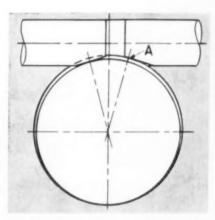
Clamping action of unit in Fig. 9 is shown in exageration in this sketch.
